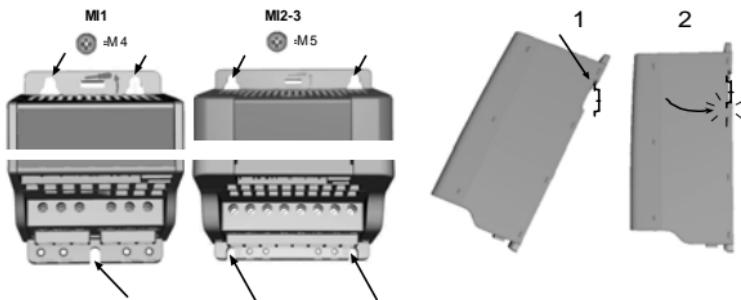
Screw mounting (left) and DIN-rail mounting (right)
